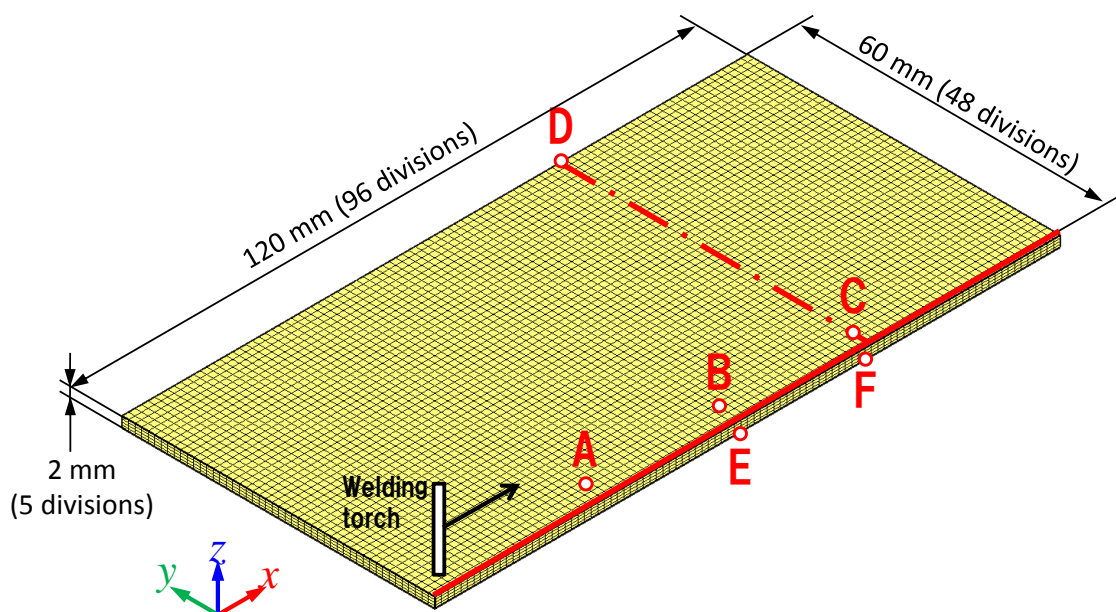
Analysis model of bead on plate welding.
